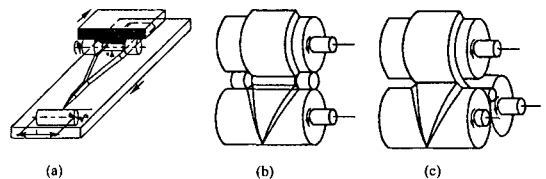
Illustration of Transverse Rolling-tool configurations: (a) Straight wedge type; (b) Two roll type; (c) Three roll type
